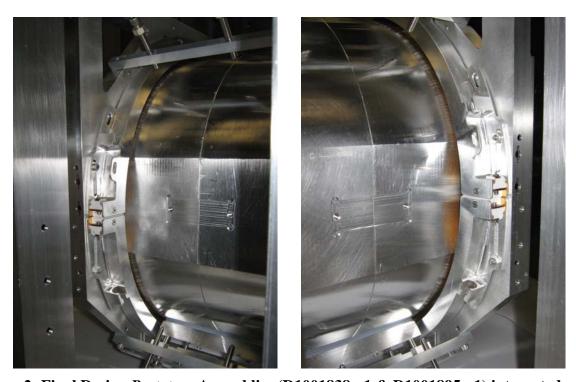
Final Design *Prototype* Assemblies (D1001838-v1 & D1001895-v1) integrated with the aLIGO Production Quad Structure.
